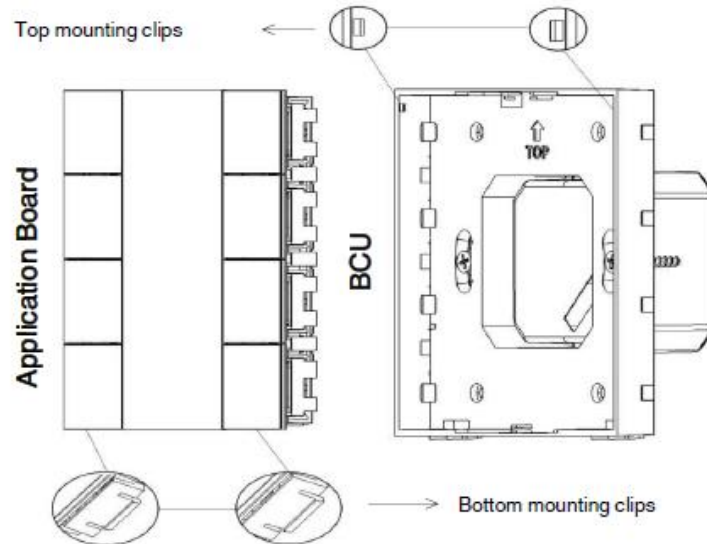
Mounting the BCU to Flush Mounting Box
